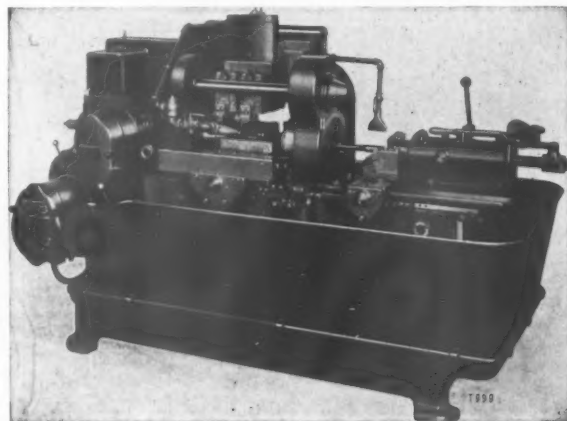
Sundstrand Model 10 Automatic Stub Lathe, with center drive and overhead slide, for turning axle shafts.
